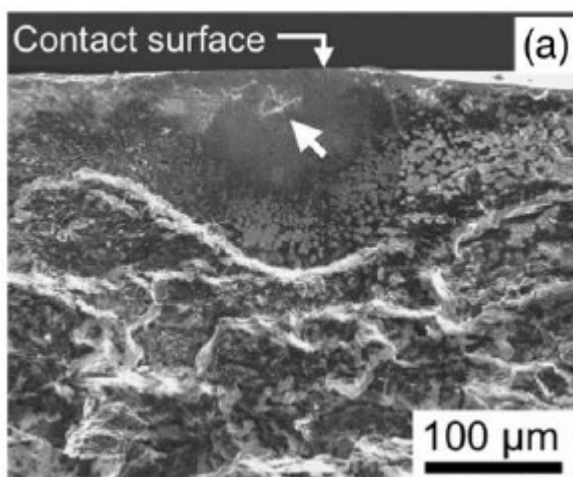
SEM fractography image of preparatively opened circular cleavage-like axial incipient cracks from an inner ring raceway of a failed taper roller bearing from an industrial gearbox [15].
